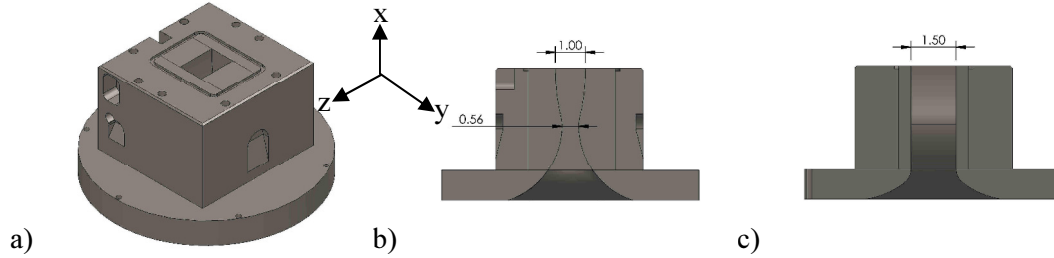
Nozzle block solid model assembly: a) isometric view, b) cross-sectional view through the y-axis, c) cross-sectional view through the z-axis.
